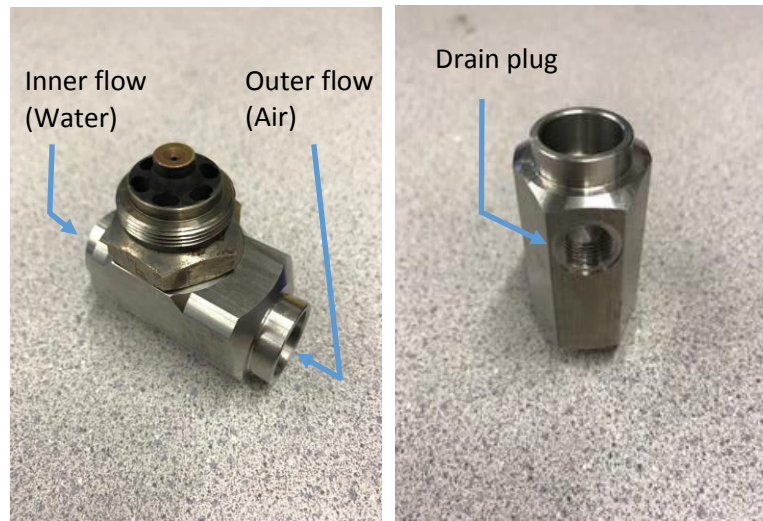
Spray nozzle and base connection assembly. (a) Isometric view; (b) Underside.
